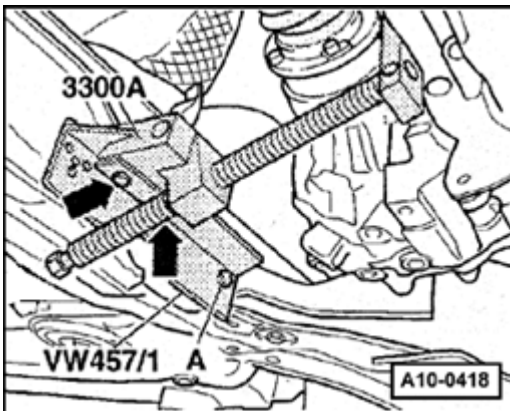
Securing Support Rails 457/1 To Subframe With Bolt M8 X 25 And Engine Support Device 3300A To Support Rails 457/1
